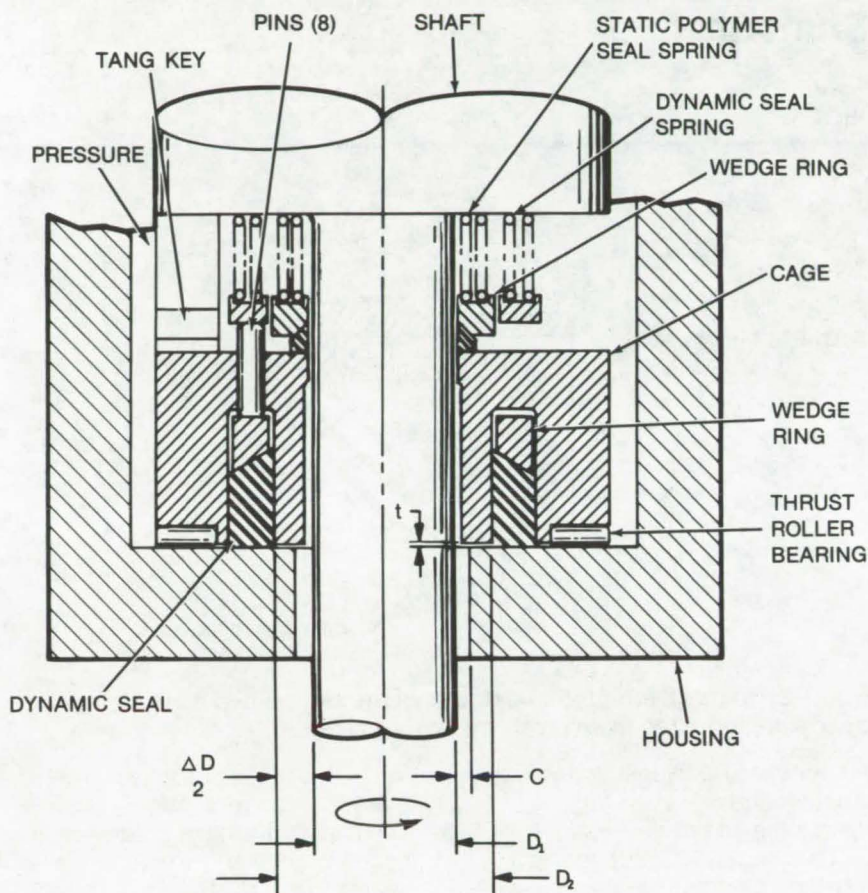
The Roller-Bearing Shaft Seal has a cage that is loaded into the housing by a static polymer seal ring.
